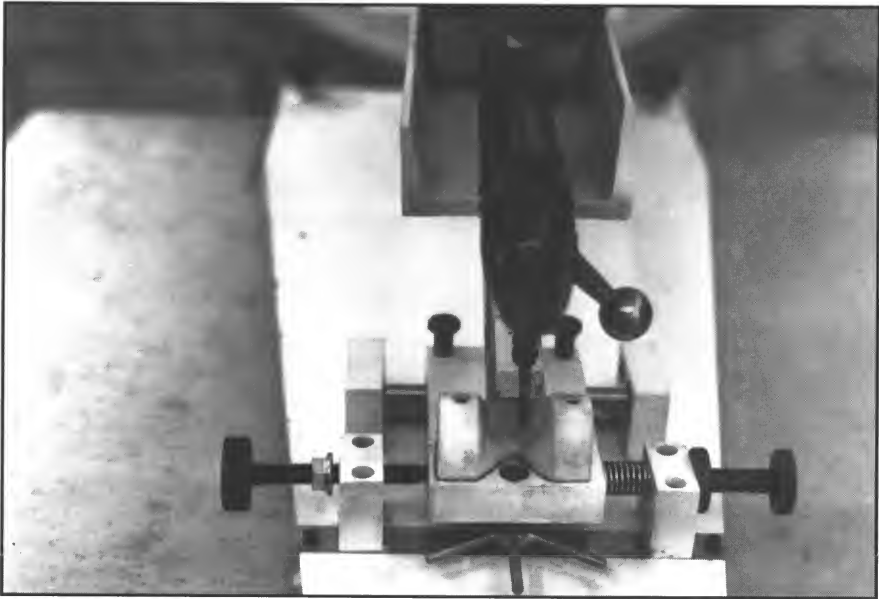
Photograph of the rear of the rail gun showing details of the windage and elevation adjusting mechanism.
